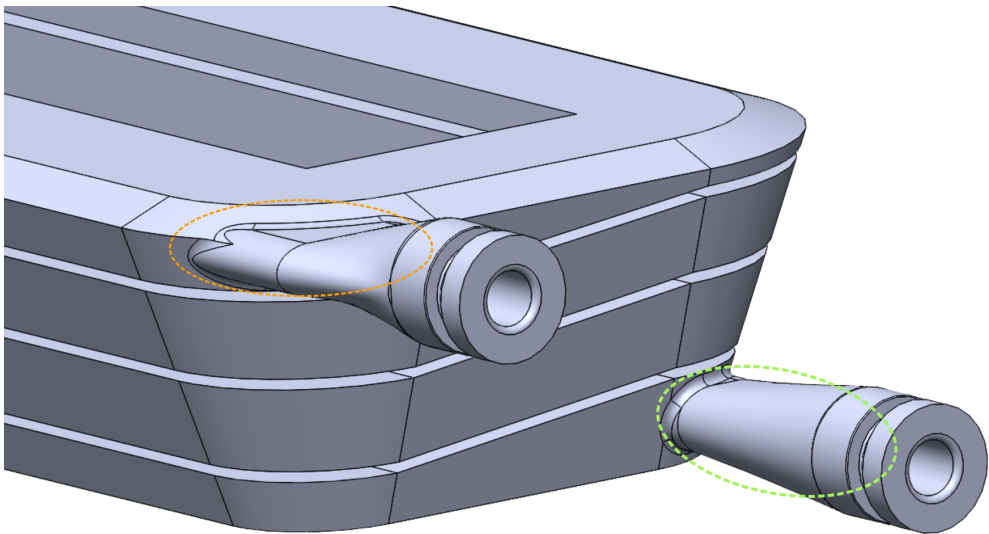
View of the hydraulic connections of the modified version of the winding.
